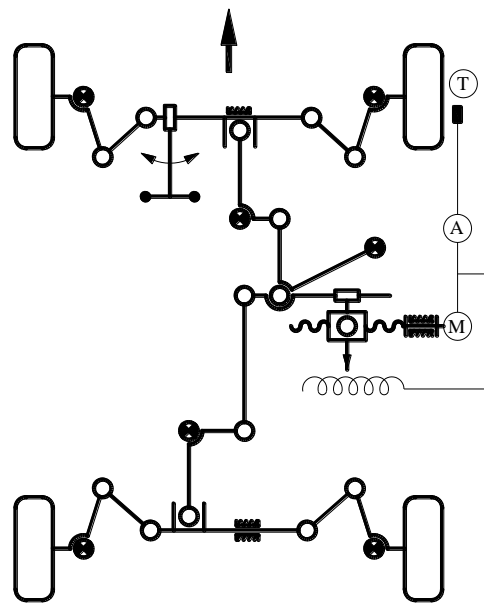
The steering angle of rear wheels commanded by screw-nut device.
